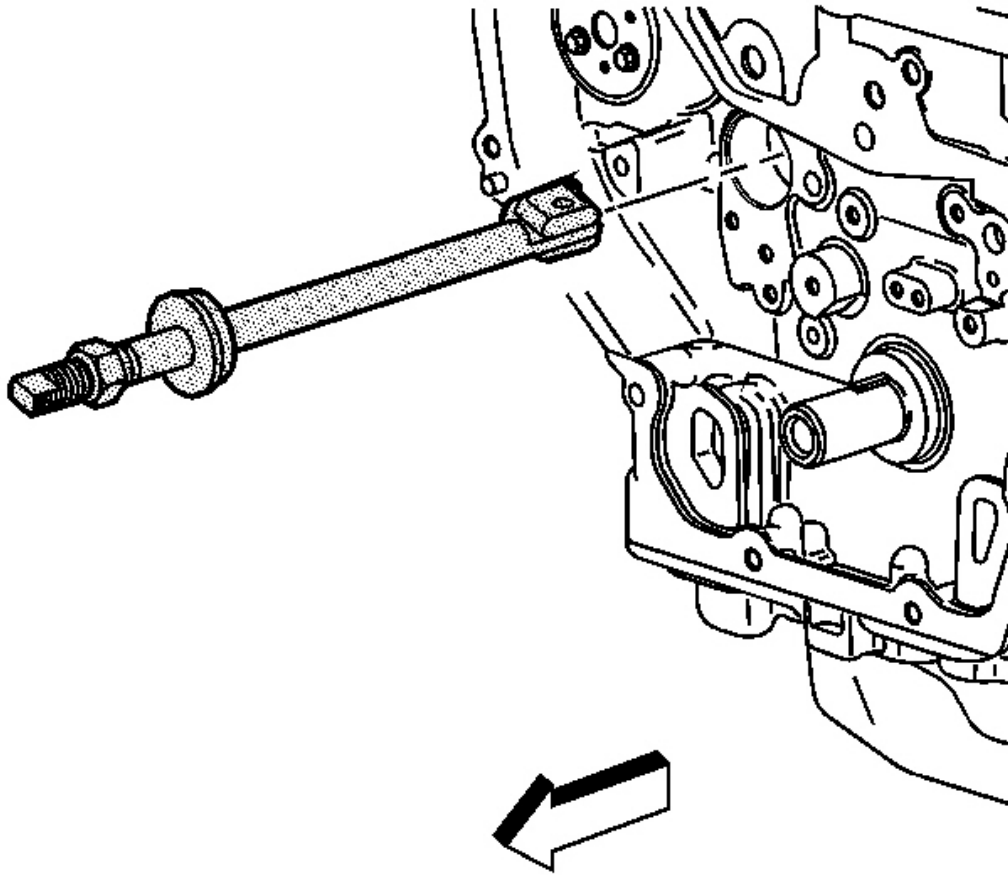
View Of J43650 Installed Into The Balance Shaft Hole
